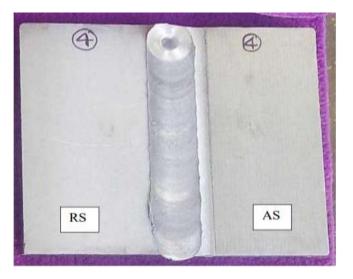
Schematic diagram of the friction stir welding Joint.
